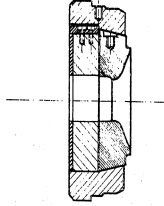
EXTRUSION SHAPE FOR P/N 226970 - SHAFT, TURBINE ROTOR FRONT.
